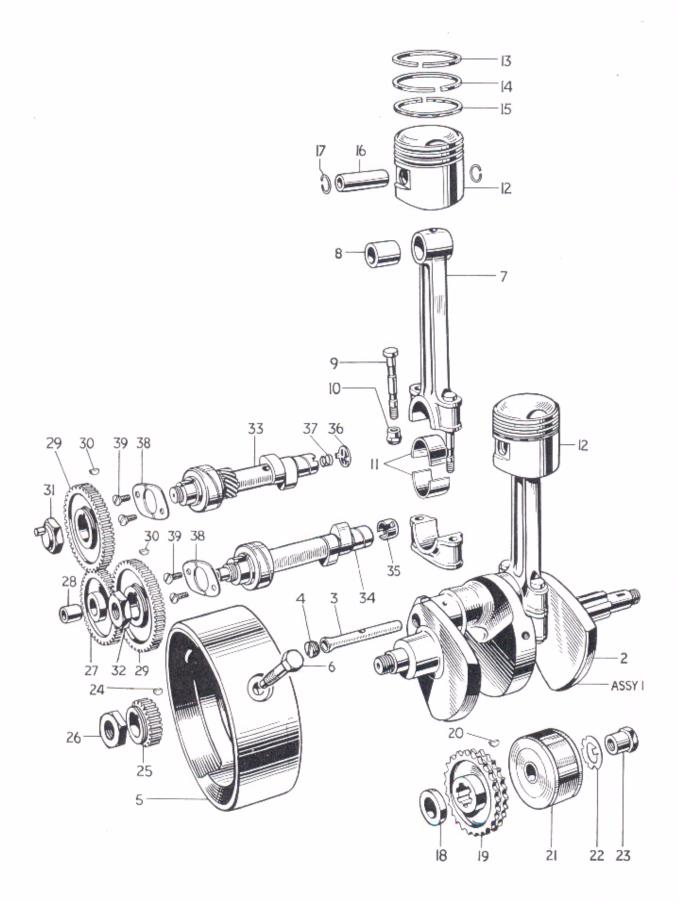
CRANKSHAFT AND CONNECTING RODS
